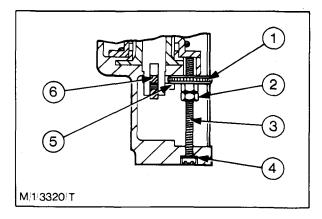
Zero Boost Fuel Adjusting Wheel Installed
